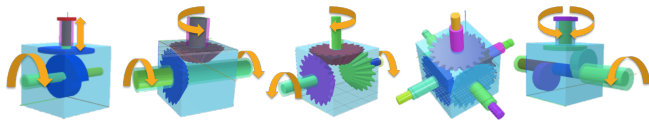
Mechanical Components: crank, bevel gear, friction gear, multi gears, double cam. Arrows were added to indicate the mobility of each unit.
